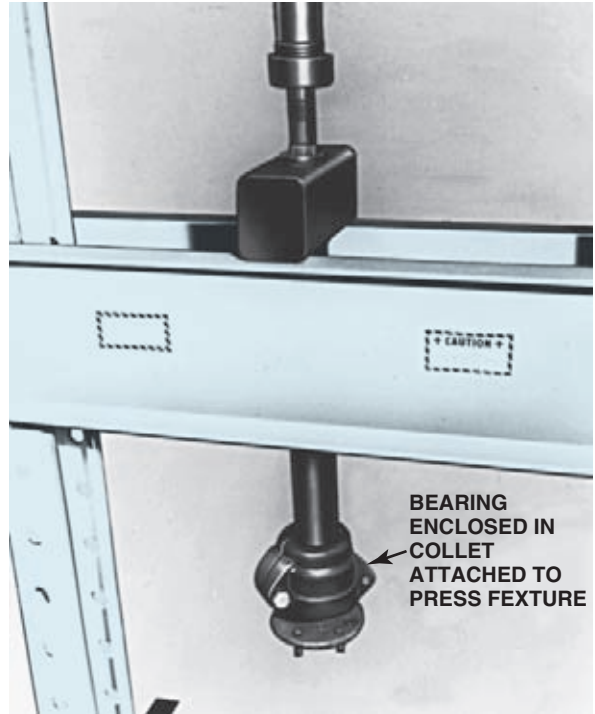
The fixture shown in Figure 12-38 has been placed in a press, and the axle is being forced from the bearing. (Courtesy of OTC Tools)
